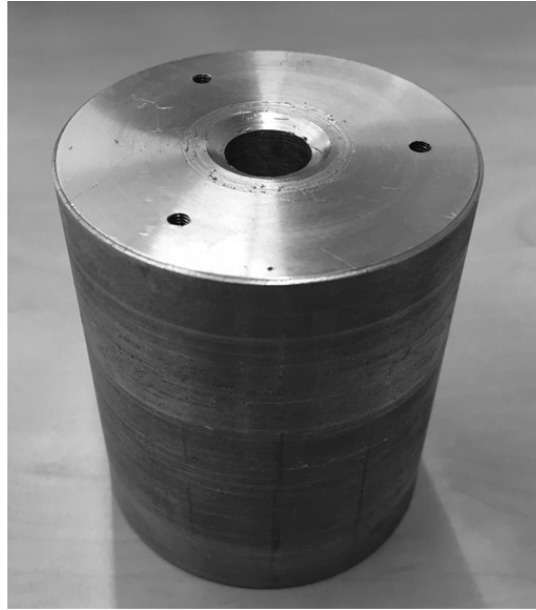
Picture of the aluminium cylinder with one central air insert (10 mm diameter) and three peripheral air inserts (3 mm diameters).
